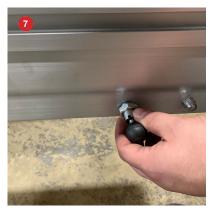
Place the movable table on top of the fixed table structure, always aligning the holes with the screws.
